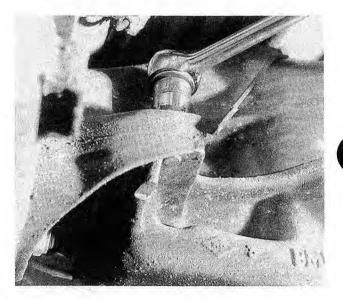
Final drive front mounting bolt being removed. Also remove front bolt from other side.
